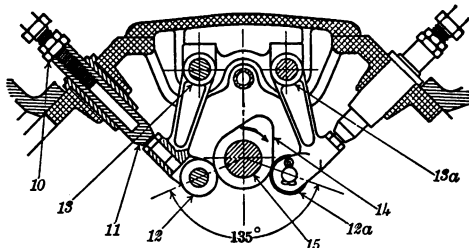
ONE CAM OPERATING TWO INTAKE VALVE RODS
